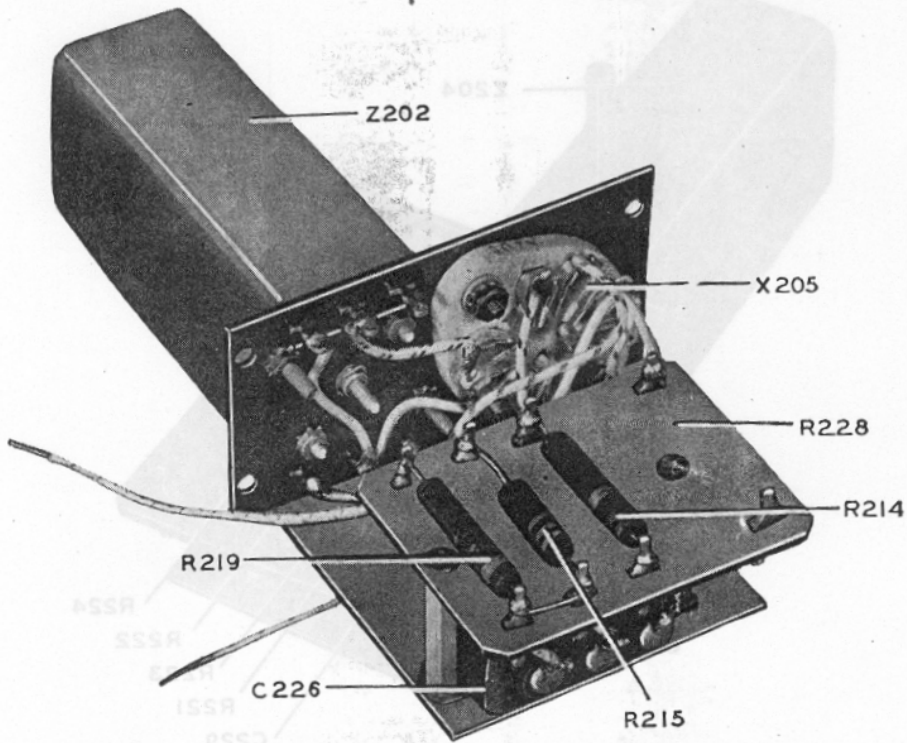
Receiver 2nd I-F Amp. Assembly—Bottom View
